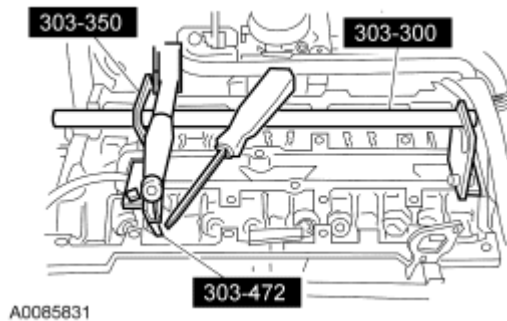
Identifying Special Tools (303-300, 303-350, 303-472)
